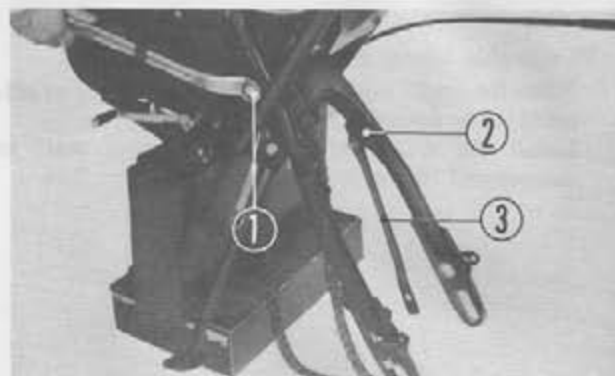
① 14mm self lock nut ② Rear fork ③ Rear brake stopper
